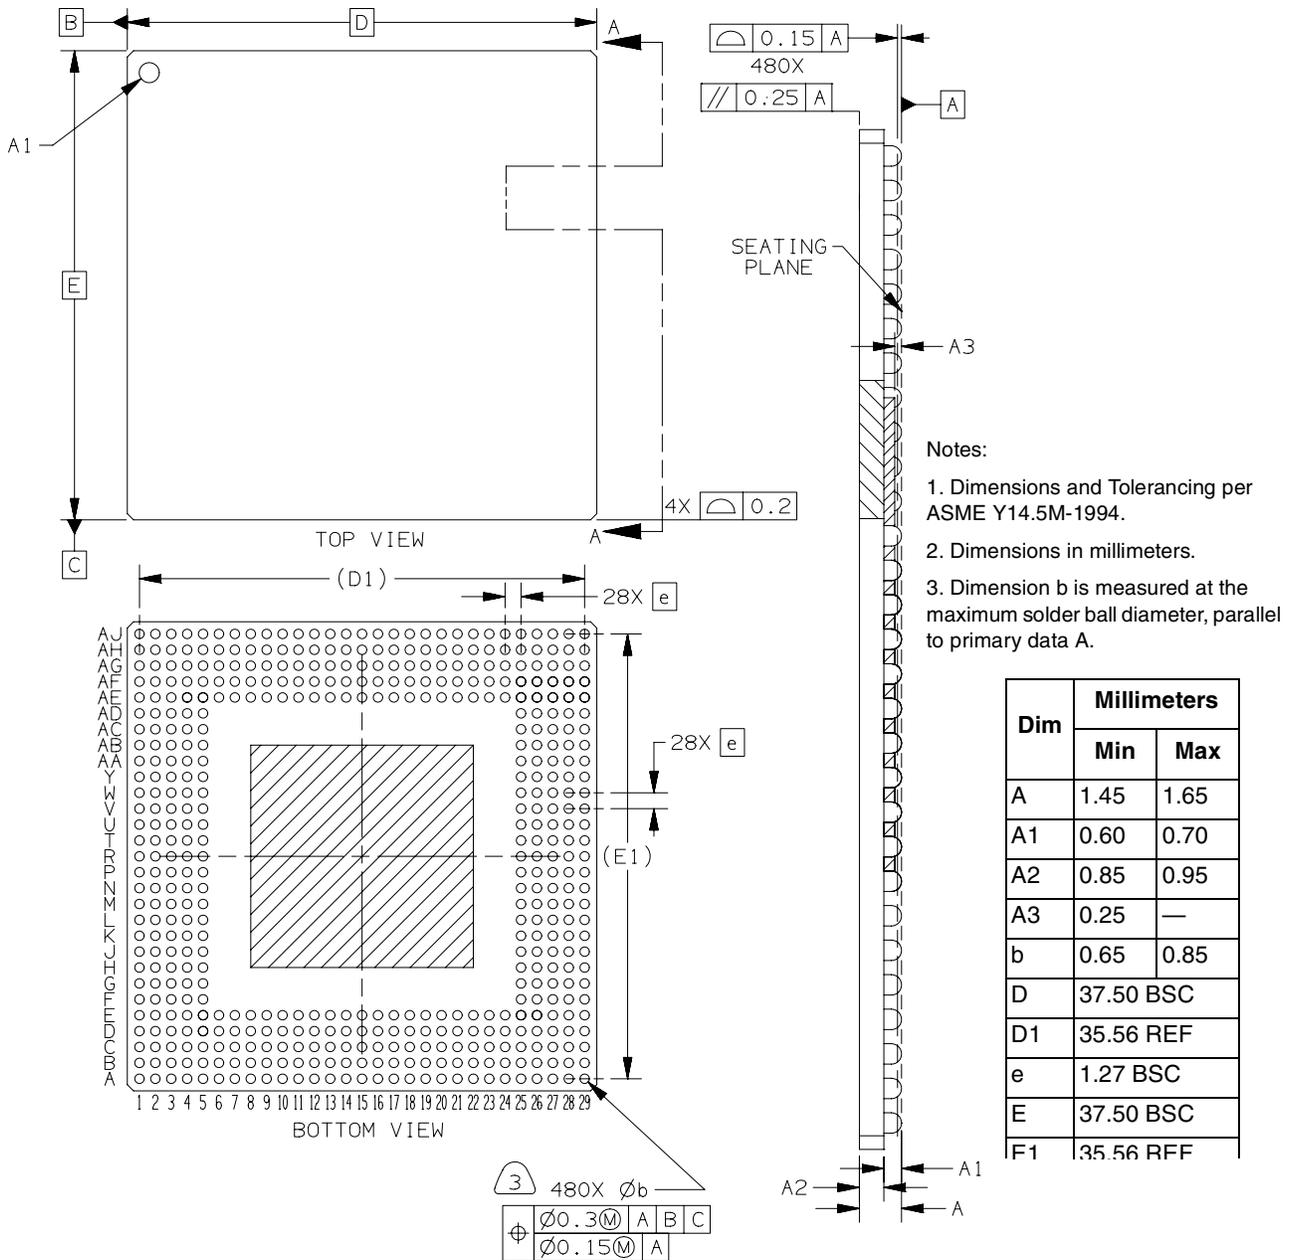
Mechanical Dimensions and Bottom Surface Nomenclature
